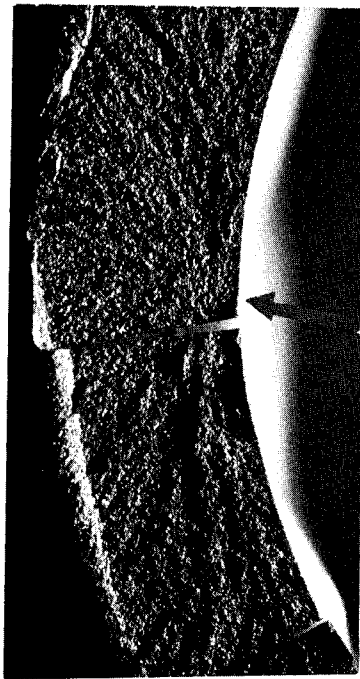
Macrograph of the lower fracture half region containing the crack origin. Mag 7.5x.
